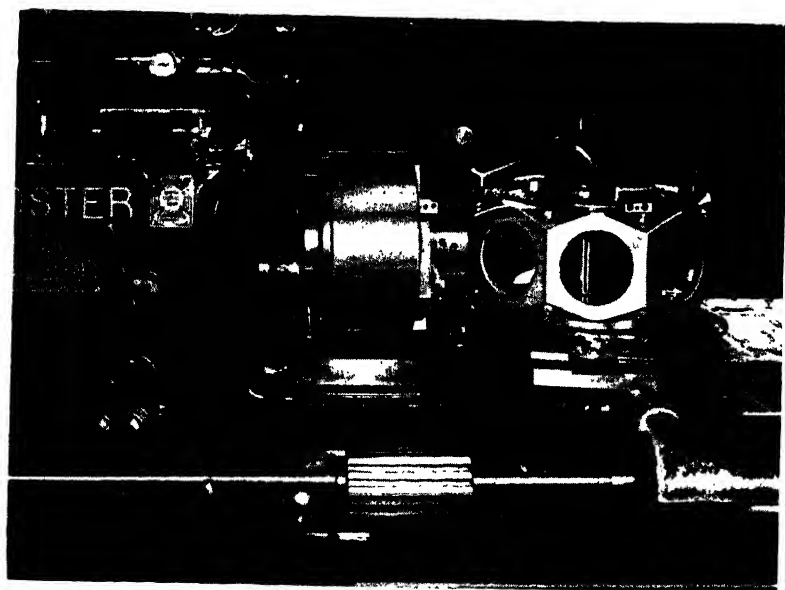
Boring and Facing Pads on Assembled Crankcase
